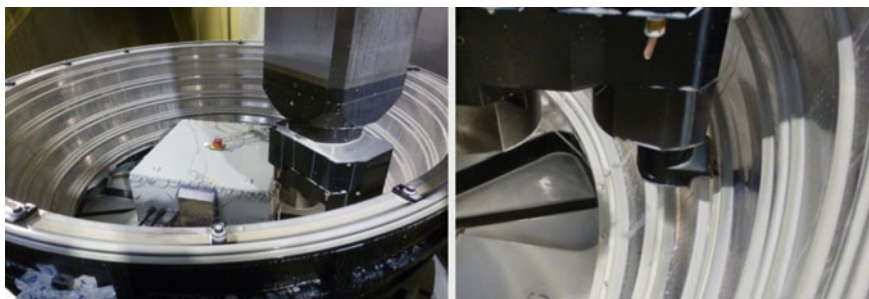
Photographs of the machining of a horizontal/radial slot
